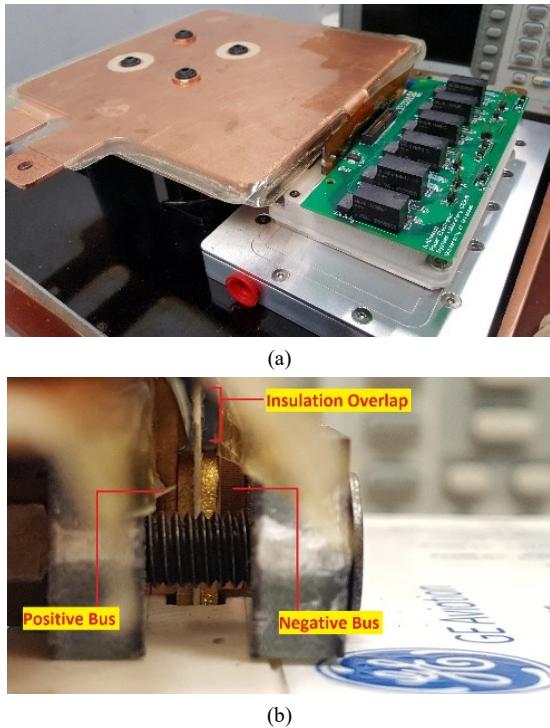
(a) the inverter power stage after assembling. (b) a zoomed in image of the bussing clamping mechanism.
